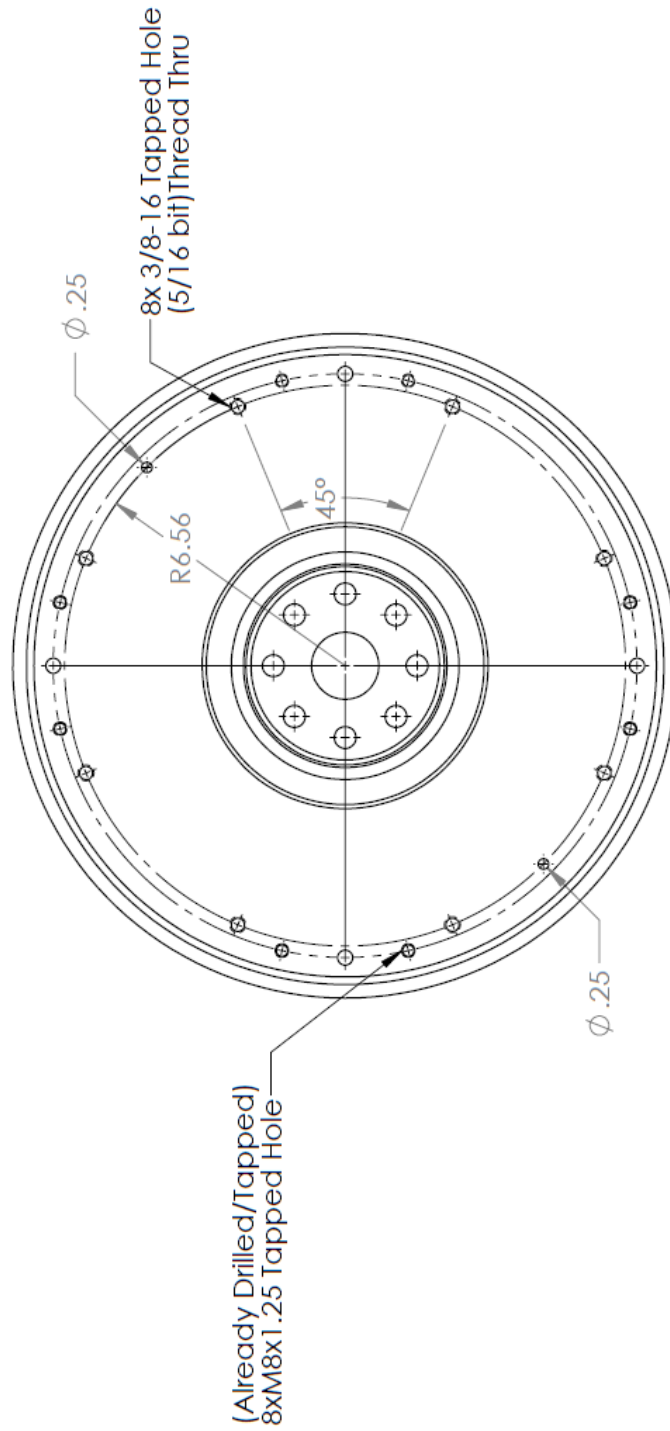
Drawing for Flywheel Modifications (SAE 11.5 Modified)
